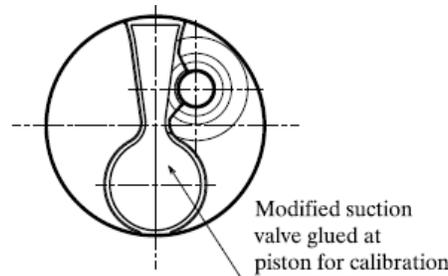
Example of position which suction valve should be placed in the piston recess for calibration.
